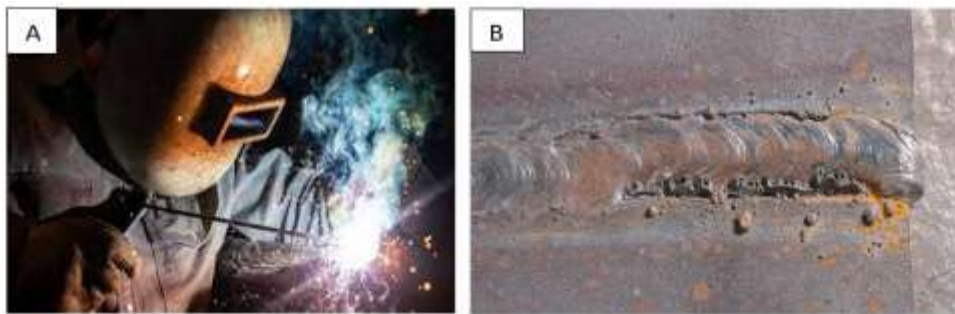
(A) A TIG welder (www.caller.com) (B) Spatter image (www.twi-global.com)
